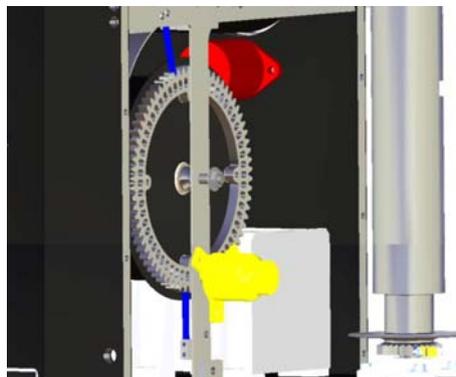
Boom hub with gear and leaf springs (blue). The pin –puller (yellow) lock into the holes of the gear
